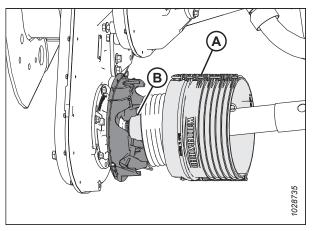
Driveline Installed on Float Module Gearbox Shaft
